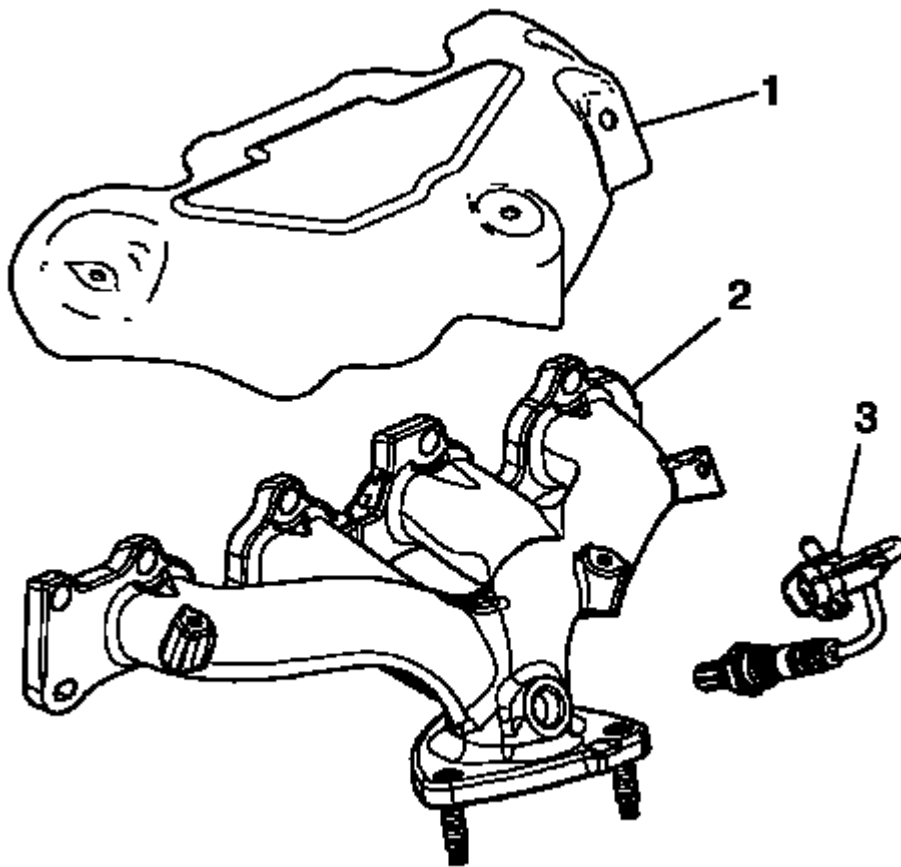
Exhaust Manifold, Oxygen Sensor And Heat Shield
